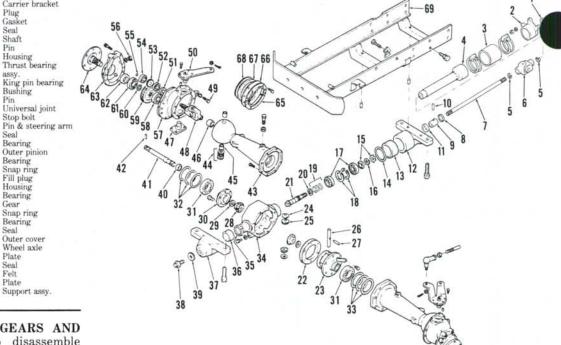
Exploded view of front wheel drive axle used on 1100 and 1200 models.
